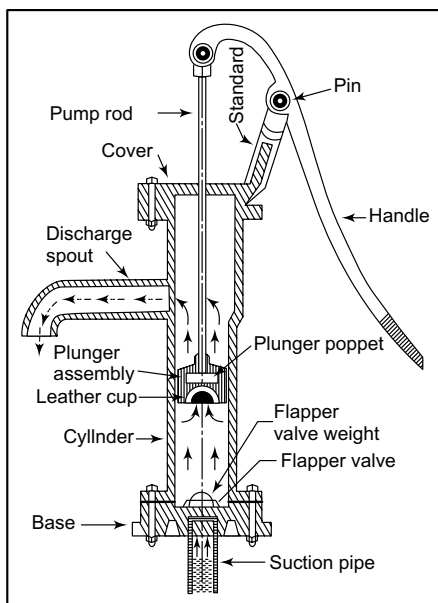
Sectional view of head assembly of a shallow-well lift pump
